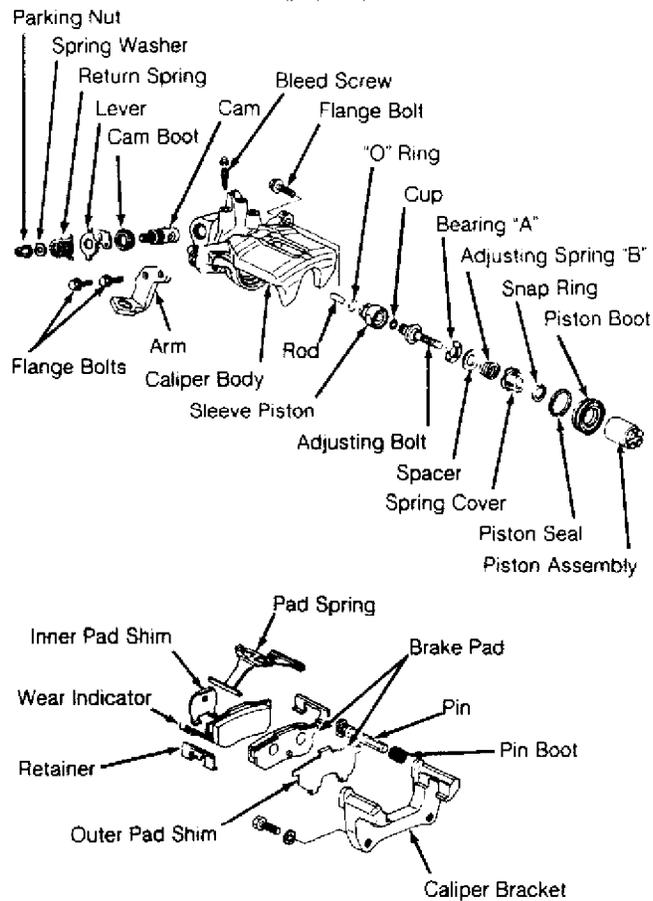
Exploded View Of Rear Disc Brake Caliper (Typical)
